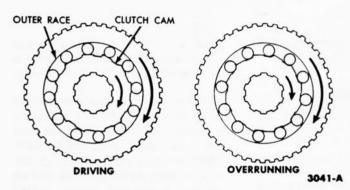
Overrunning Clutch (Free-Wheel Unit) Operation
